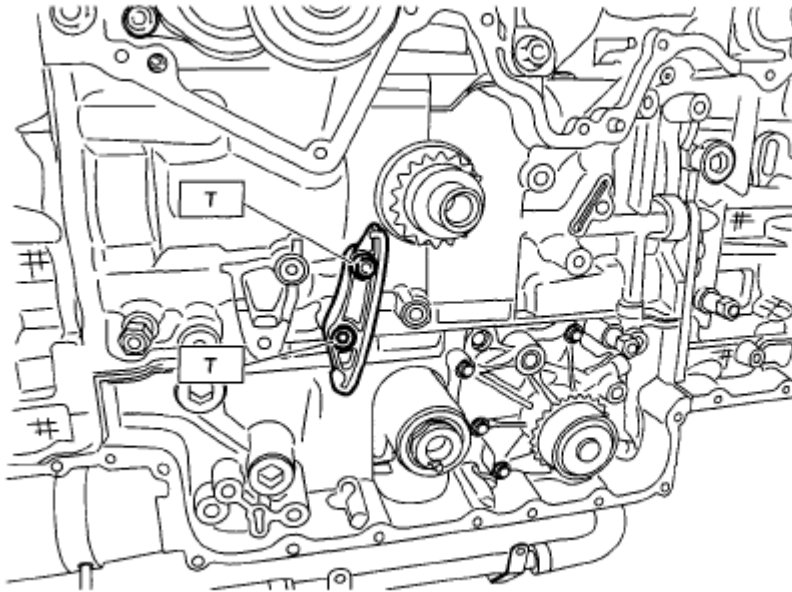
Identifying Chain Guide Bolts With Torque Specifications
